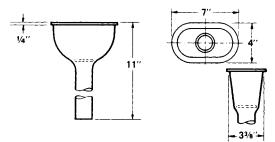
Plain End Outlet 3- by 6-in. Oval
